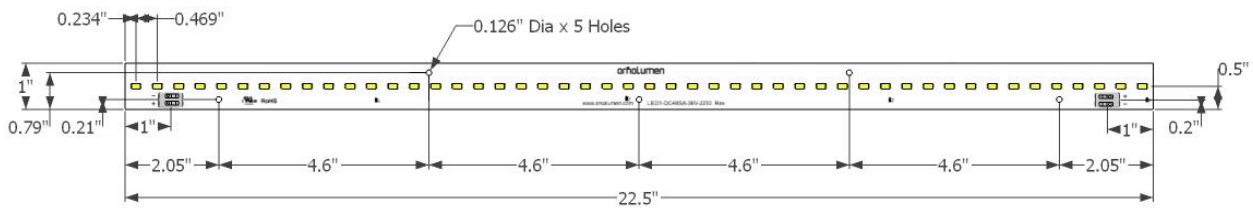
QC48SA-36V-2252 Mechanical Drawing
